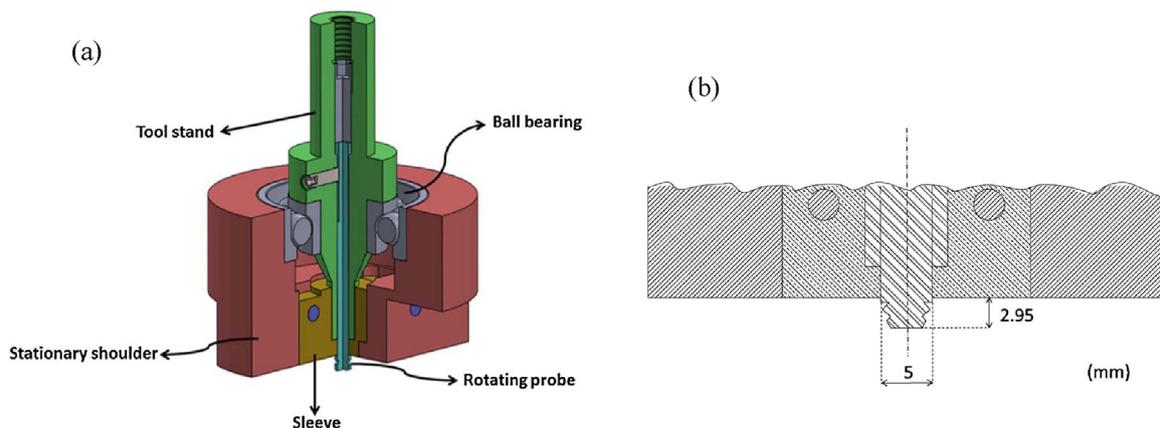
FSW tool 3D CAD model (a); section view of the probe (b).
